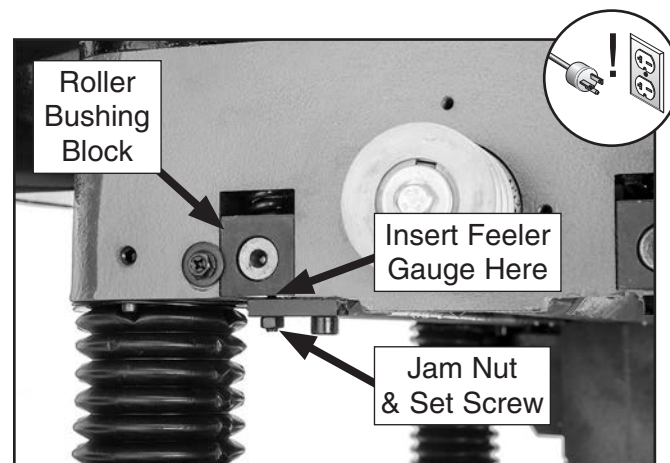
Feeler gauge location for adjusting infeed roller height when using wood blocks.
